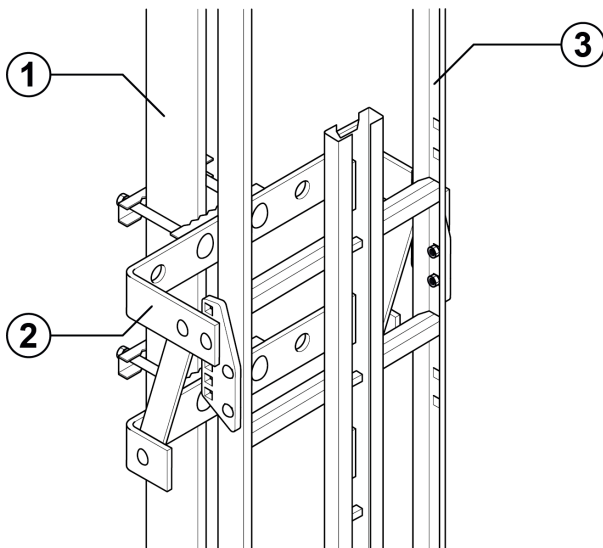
Standoff Corner Base Mounting Assembly (P/N 506400 GALV.)
